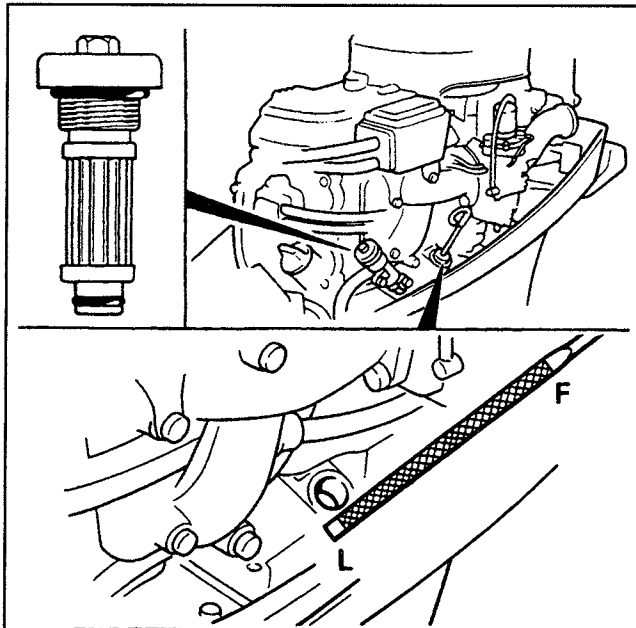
On late-model 9.9's the oil filter is threaded into a bore just behind the dipstick
